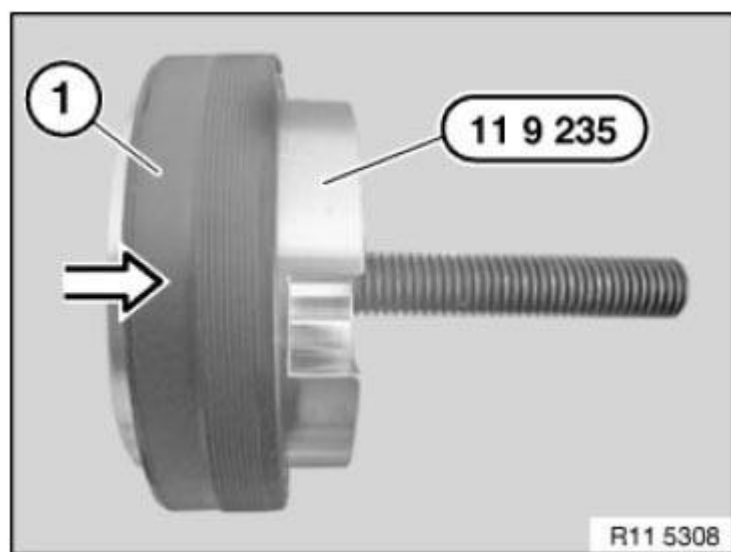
Pushing Radial Shaft Seal 11 9 235 Carefully On Special Tool
